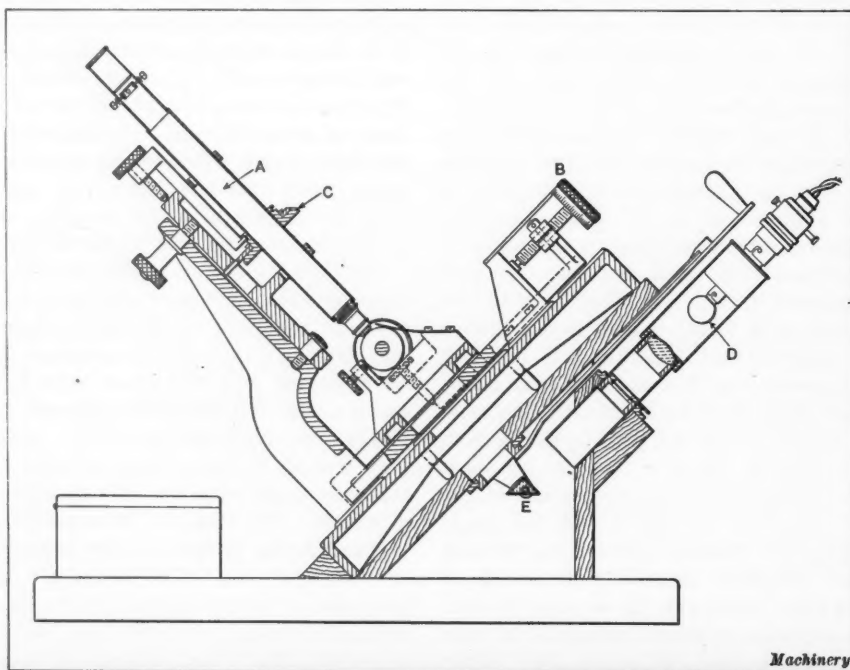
Side Elevation of Screw Measuring Machine shown in Fig. 1
